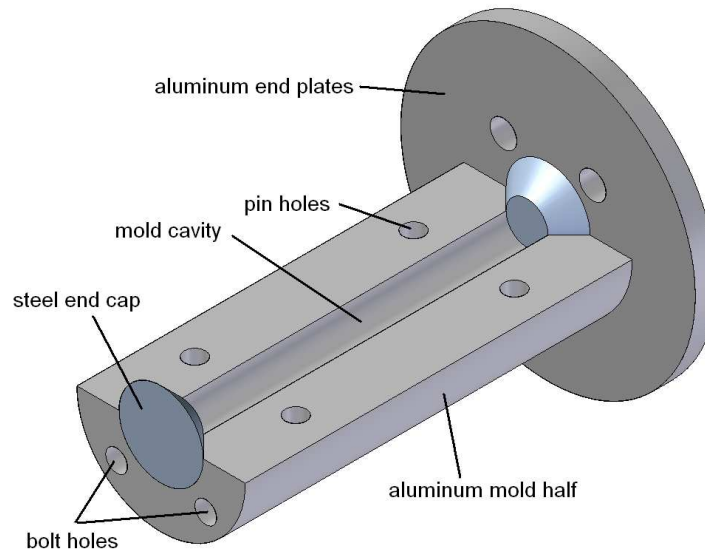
Mold cavity displaying placement of steel end caps and aluminum end plate.
